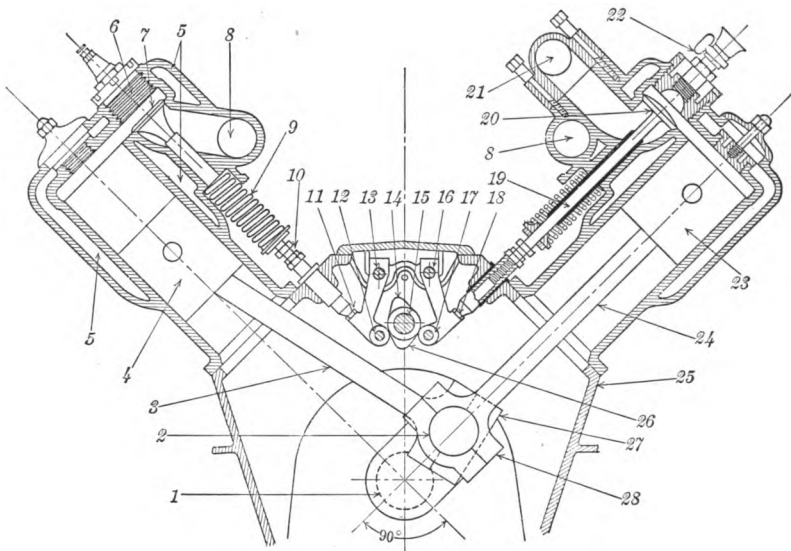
CADILLAC 8-CYLINDER ENGINE, CROSS-SECTION THROUGH INTAKE VALVE ON LEFT AND EXHAUST VALVE ON RIGHT
